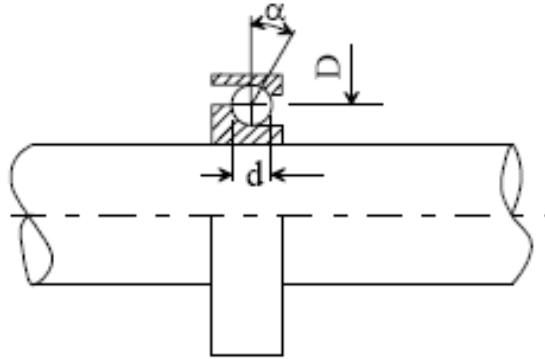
Geometry of a ball bearing Courtesy [9]
